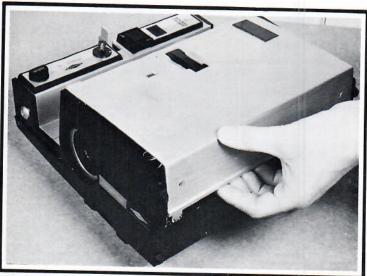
Removing the mechanism cover is the first step in disassembly.
